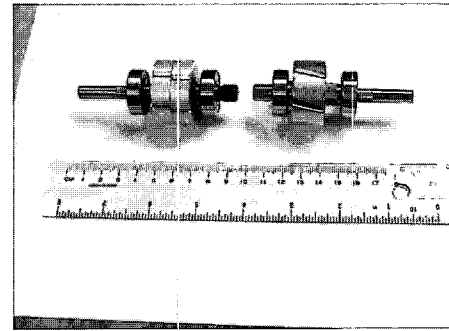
Cogging torque reduction using step-skewed and skewed arc magnets.
